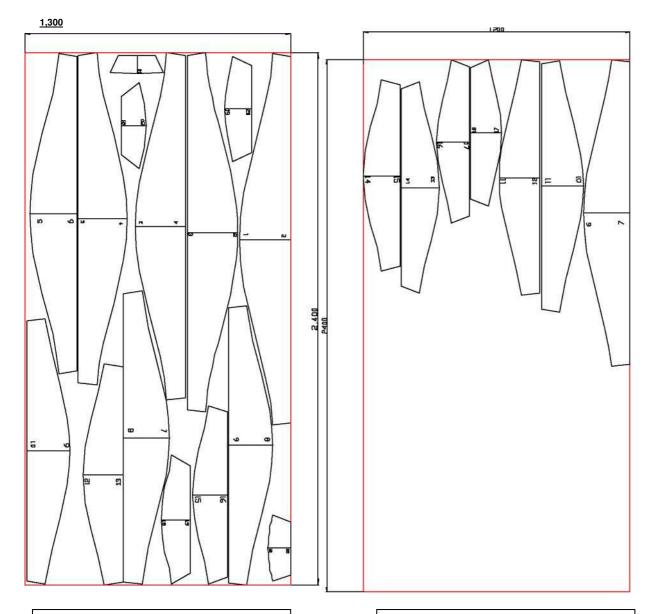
Positioning of the spiral templates on the steel sheeting for marking and cutting (Segments as indicated)
